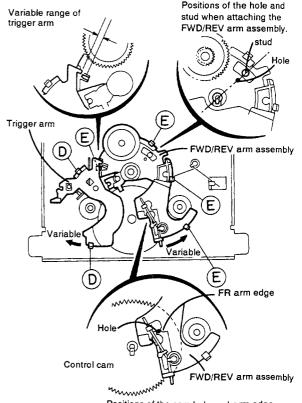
Positions of the cam hole and arm edge when attaching the FWD/REV arm assembly.
